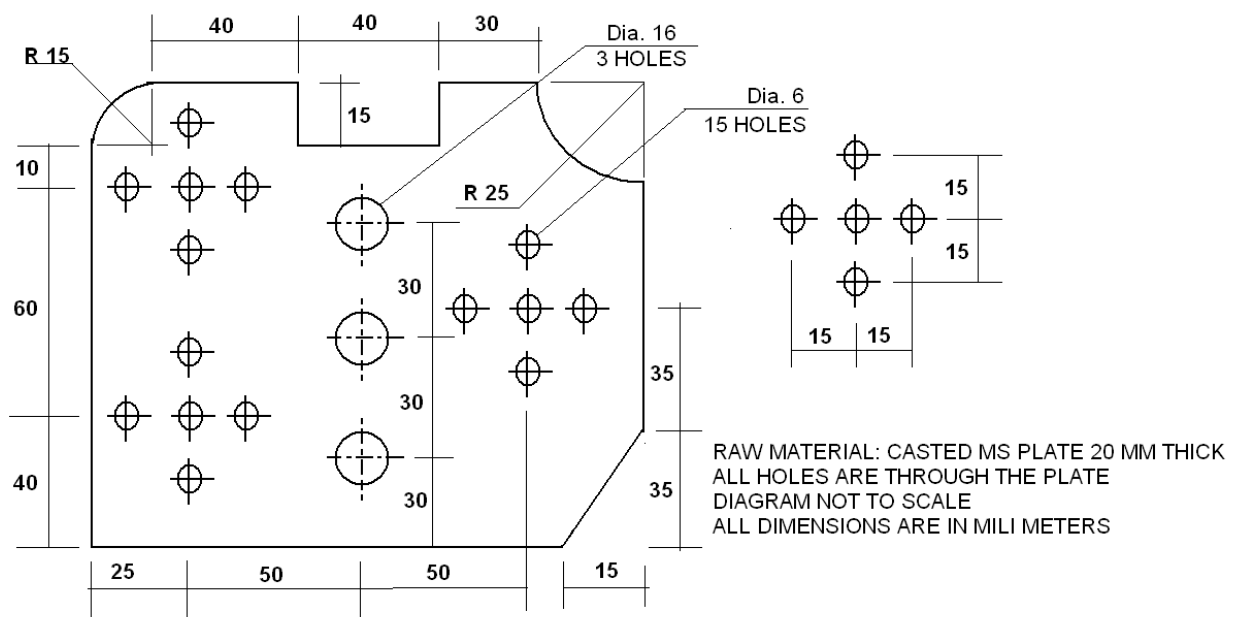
A component to be machined on a vertical machining center (VMC)
